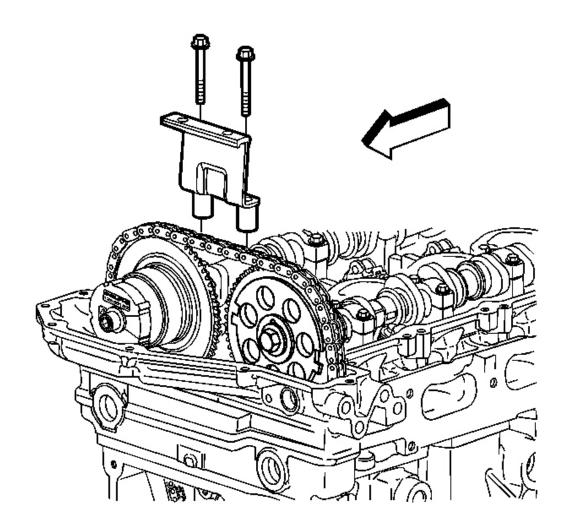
View Of Upper Timing Chain Guide Courtesy of GENERAL MOTORS CORP.
